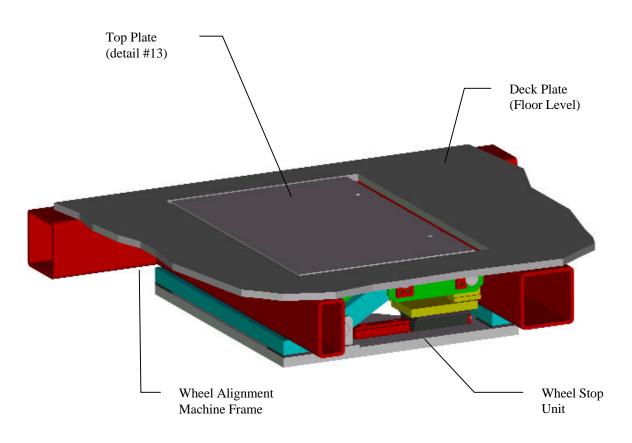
Working Assembly (Down Position) – Cut Away Section View
